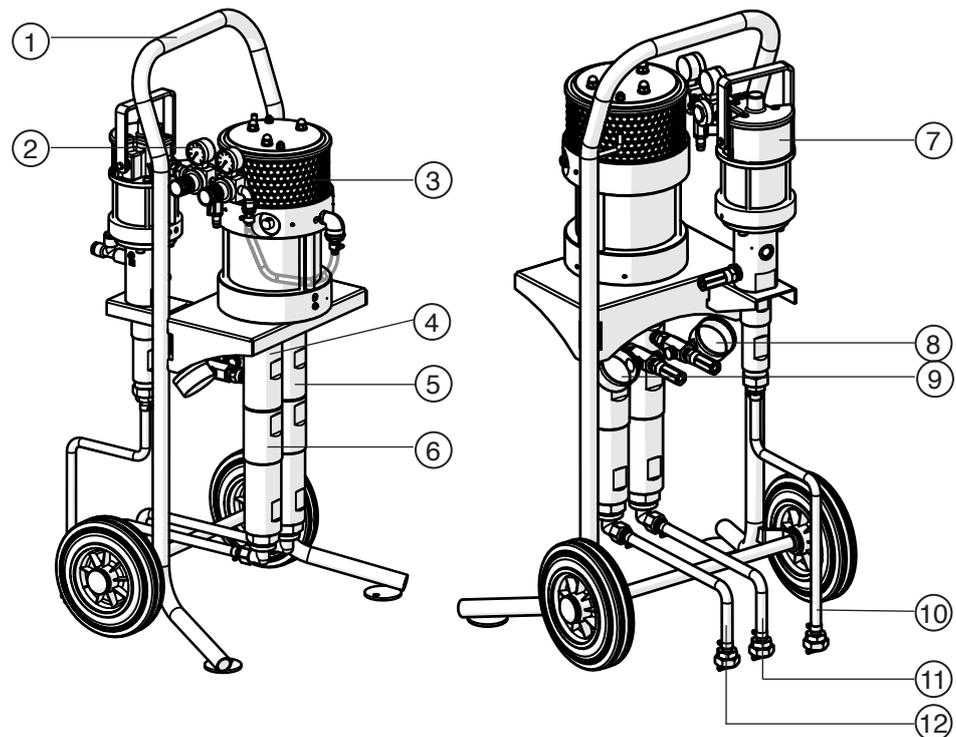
Front view and rear view of an injection unit with attachment kit for suction hose
